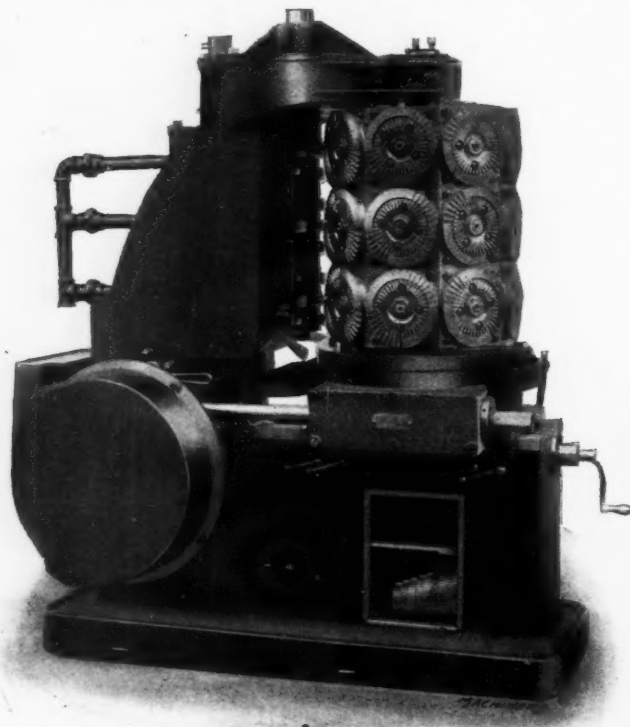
Gould & Eberhardt Special Turret-type Bevel Gear Roughing Machine for roughing out Automobile Bevel Ring Gears
